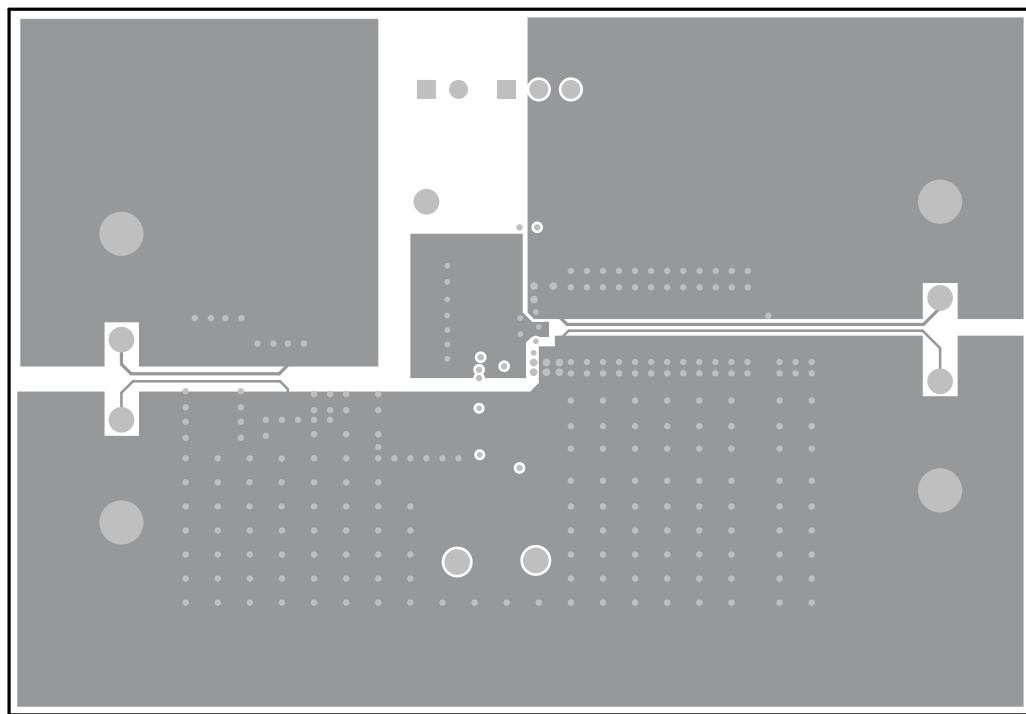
TPS61288EVM-064 Inner Layer2 Layout
